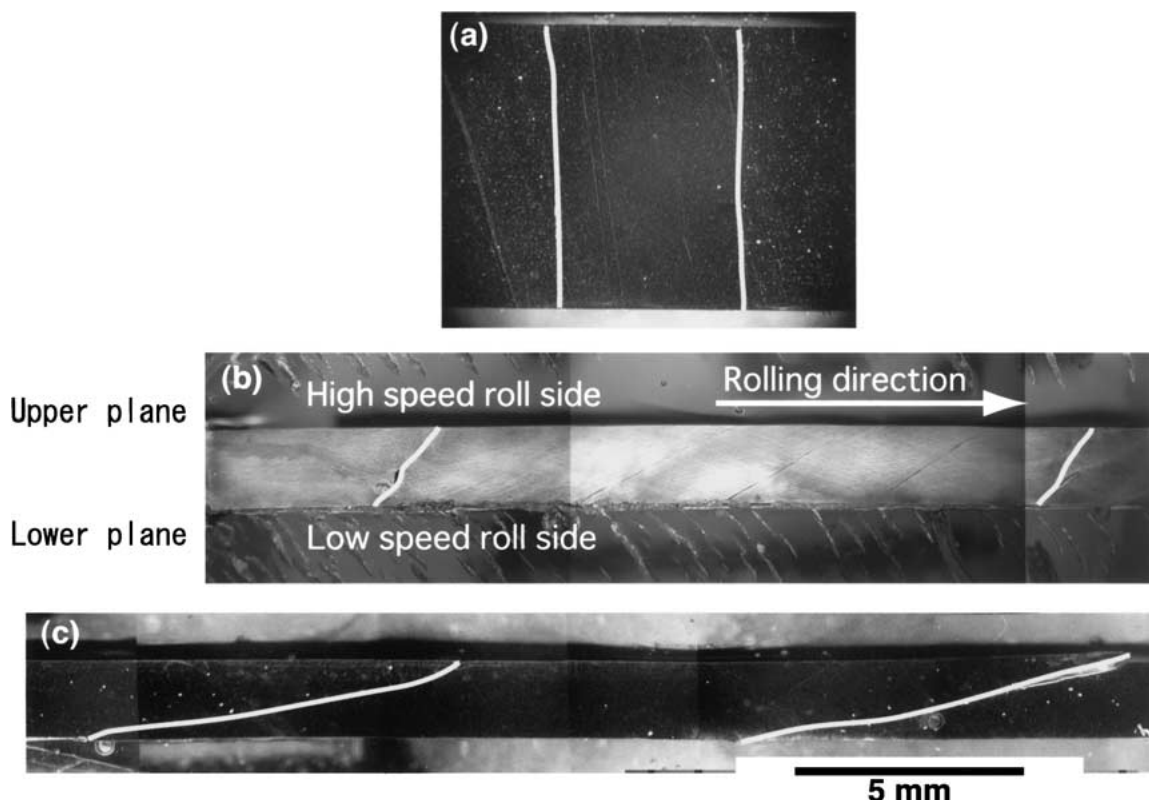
Macroscopic change of the inserted pin for (a) material before hot rolling, (b) asymmetrically rolled material by reverse rolling and (c) asymmetrically rolled material by unidirectional rolling. White lines show the boundary between the matrix sheet and the inserted pin.
